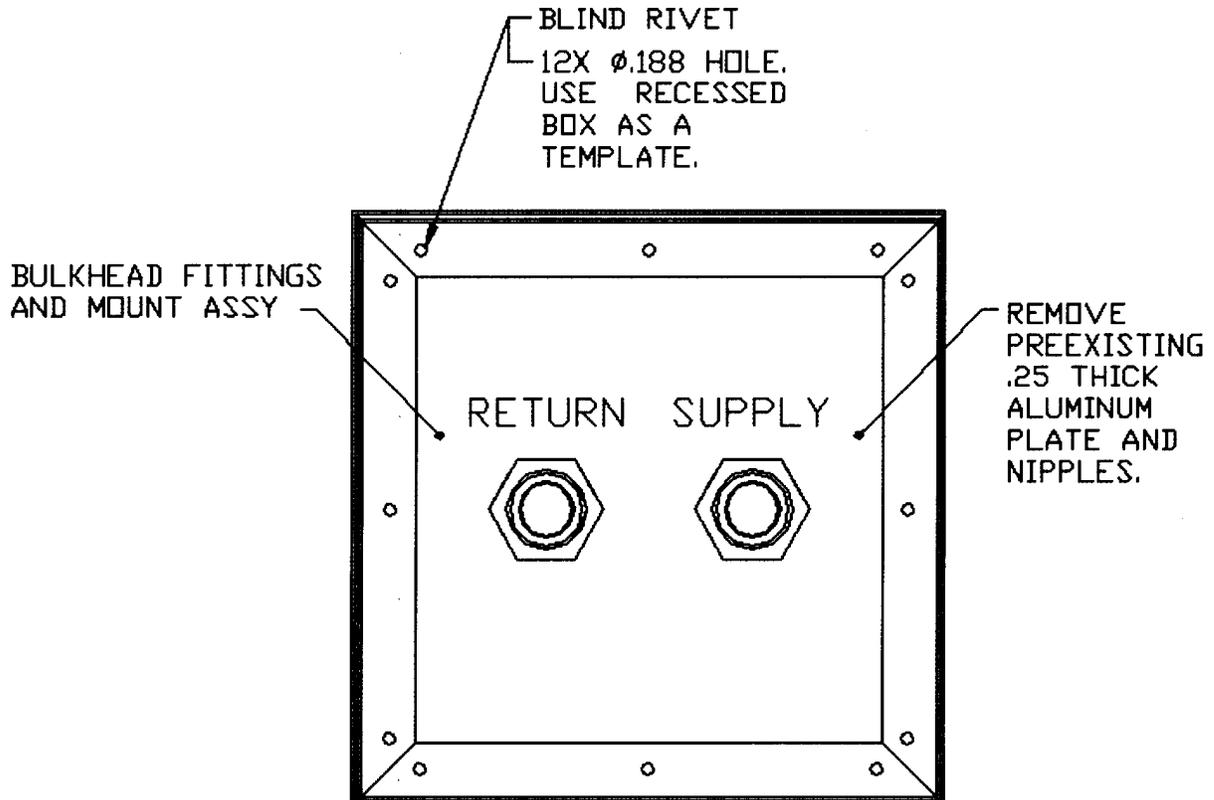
Bulkhead Fittings and Mount Assembly Installation
